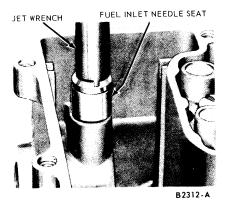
Fuel Inlet Needle Seat Removal or Installation
